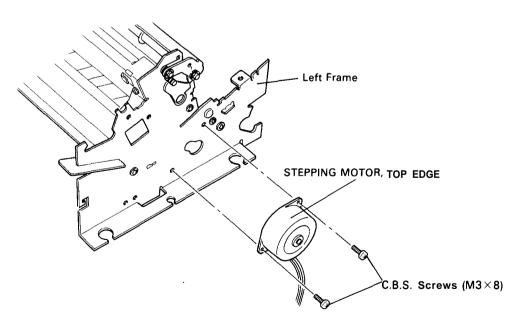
STEPPING MOTOR, TOP EDGE HOLDER Removal
